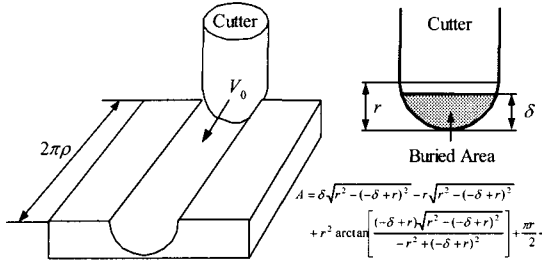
Cutting length and buried area of a cutter during the finish cut
